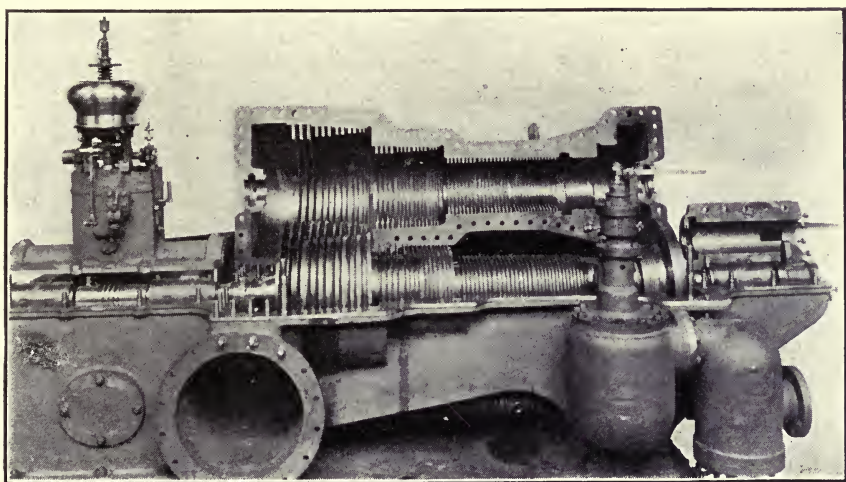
Westinghouse-Parsons turbine of an early type, with the top of the casing removed.
